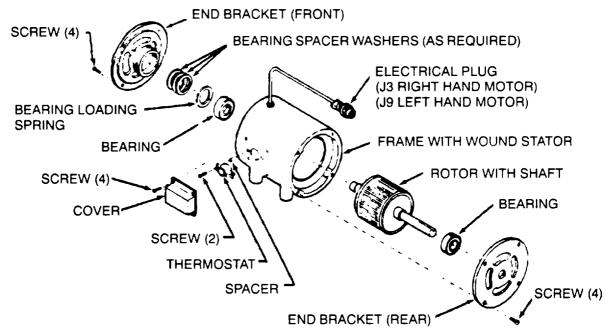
Evaporator Fan Motor (B3 and B4) Internal Parts
